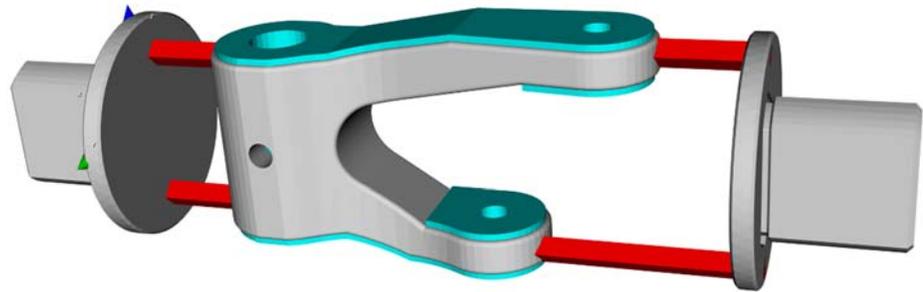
Part model in AMFCreator, with sacrificial supports, fixture clamping elements, and machining allowance on critical surfaces
